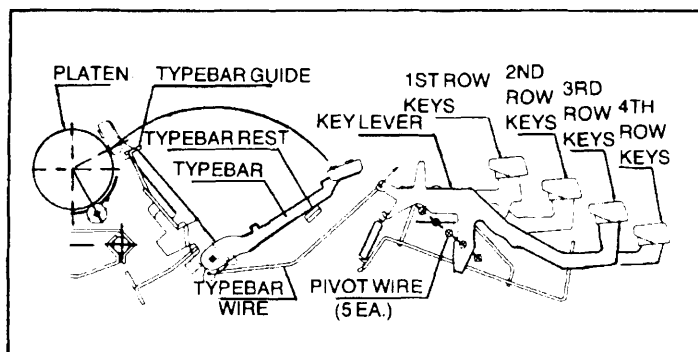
This typing mechanism, from the Brother Model JP7, further illustrates typing mechanism principles (courtesy of Brother International Corporation).
